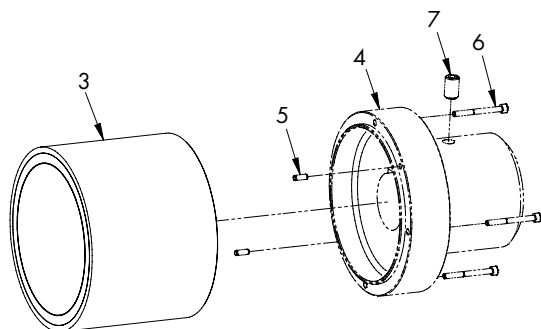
Mounting the outer rotor to the drive side (optional) (A3)
